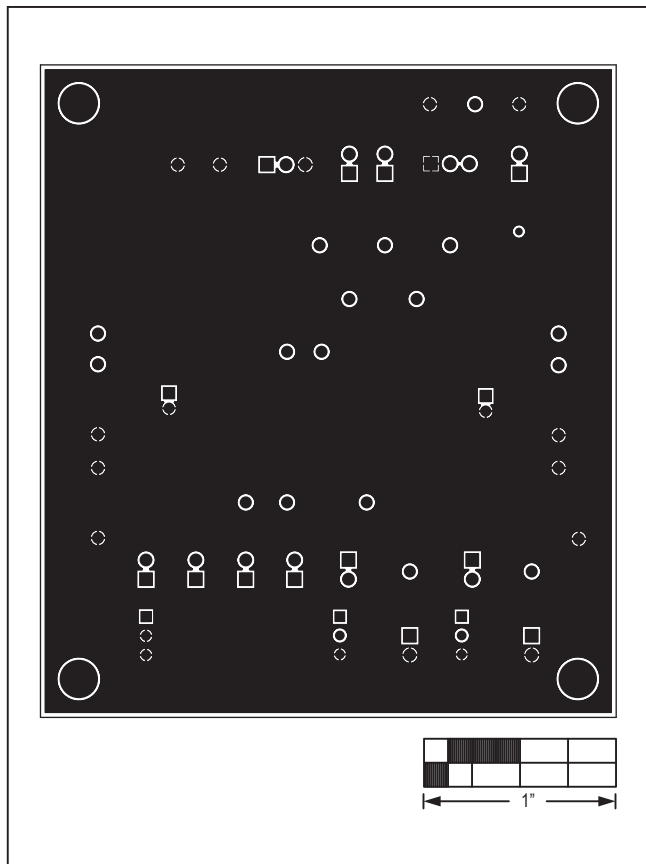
MAX14691 EV Kit PCB Layout—Internal Layer 2
